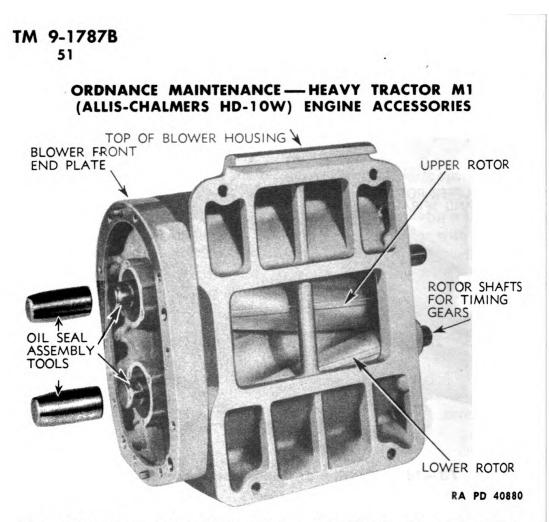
Assembling Blower Rotors into Housing Front End Plate
